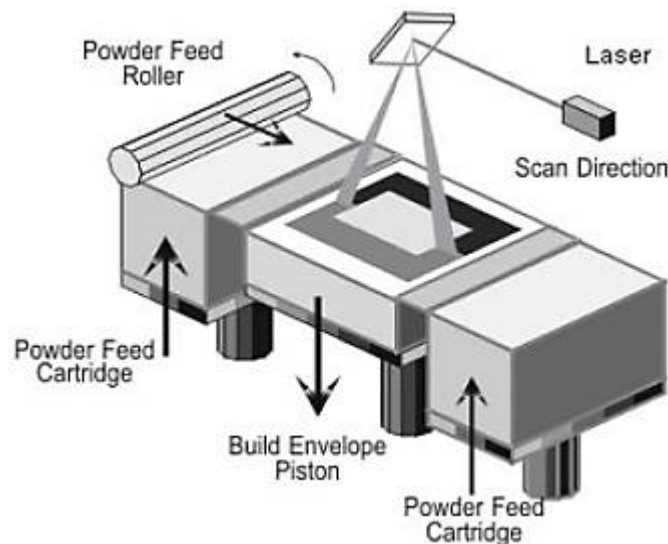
Standard selective laser sintering (SLS) system [25].
